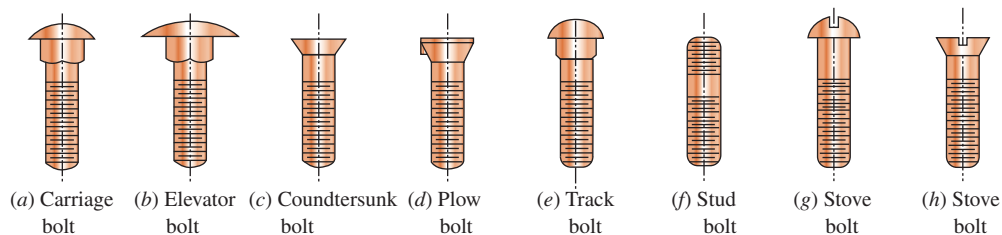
Bolt styles. See also the hex head bolt in Figure 19-1
